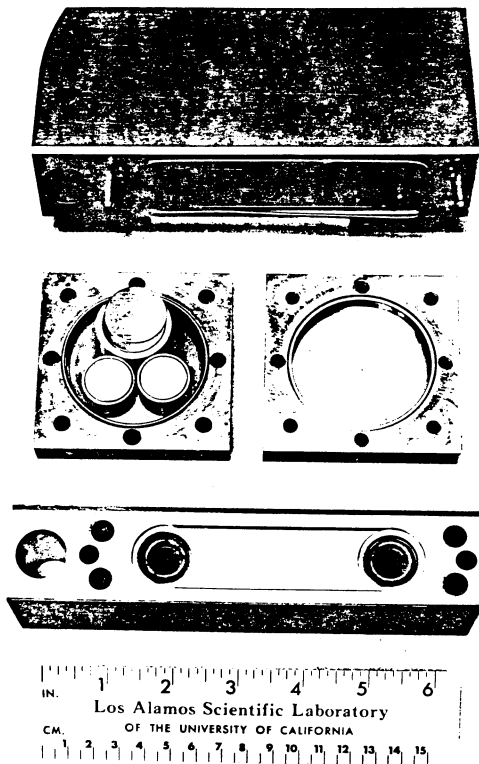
Target assembly. Individual targets (in this case Mo) are placed inside a copper container - which has a receptive area of 25 cm^2 and is 1.25 cm deep.
